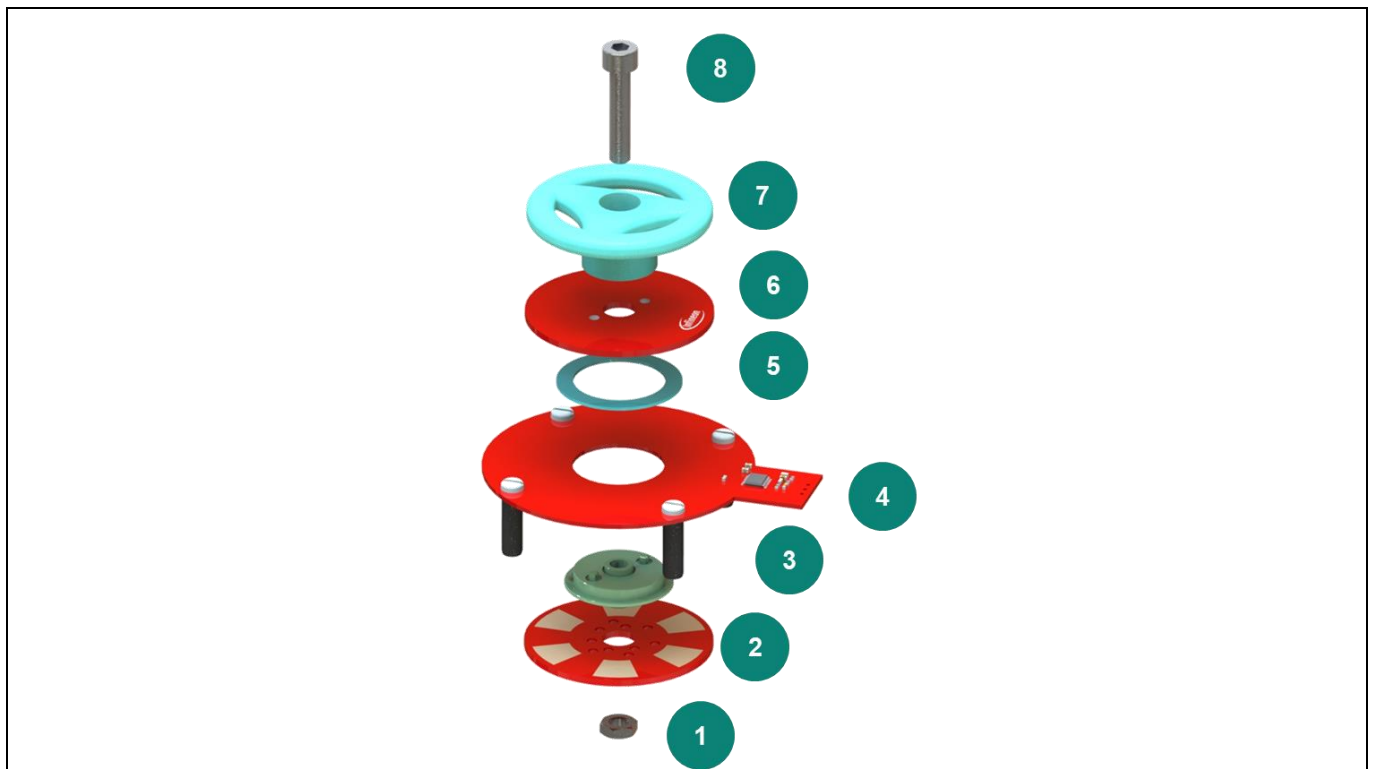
Explosion view of the ITAS_DEMO_TAS demo board
